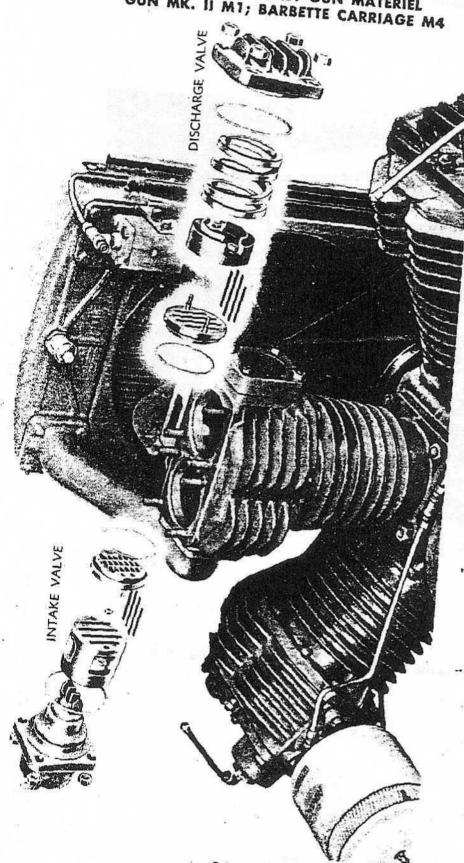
High Pressure Stage Cylinder (Intake and Discharge) Valves—Exploded View
